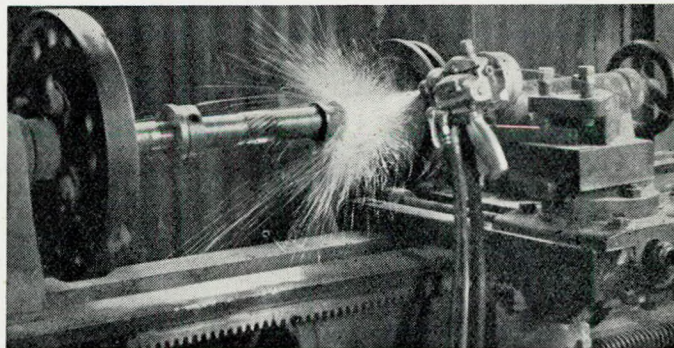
Auxiliary turbo-pump shaft being metallized with stainless steel
